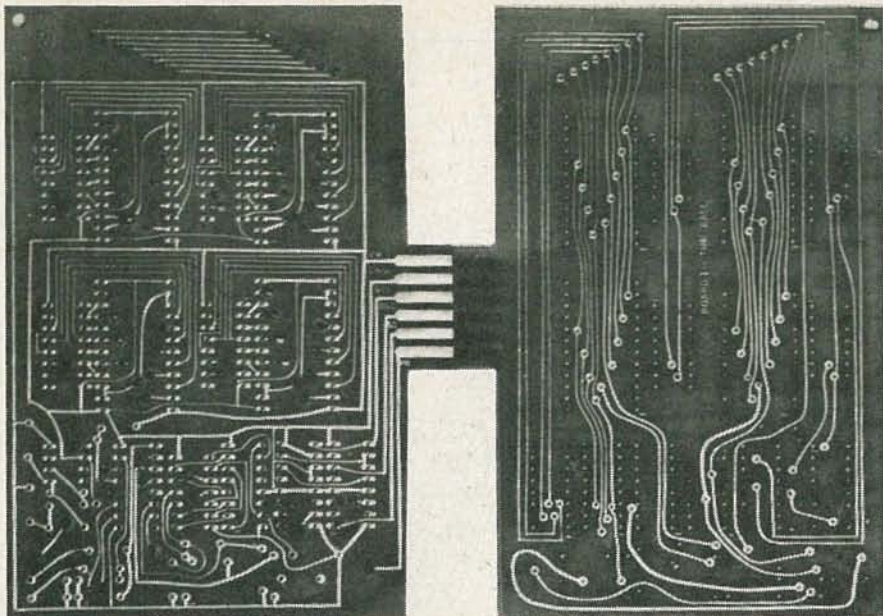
THE FINISHED LAYOUT is shown here on an etched board. Note how the traces run between the top and bottom of the board.
